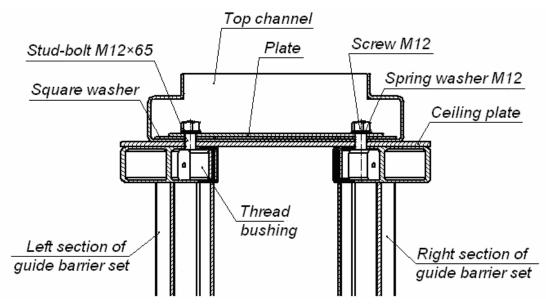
Fixing the top channel (13) to the guide barrier sections (6) and (7)
